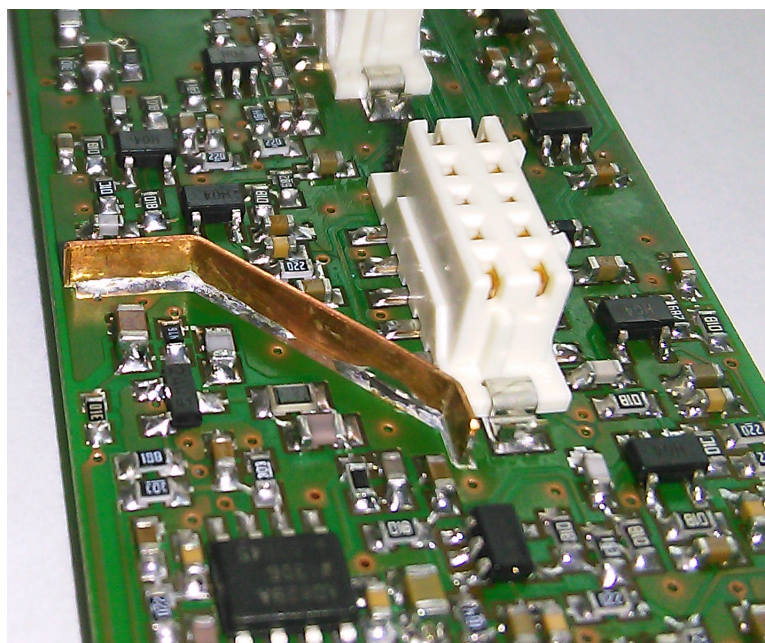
Detail of Copper wall eliminating the cross-talks
